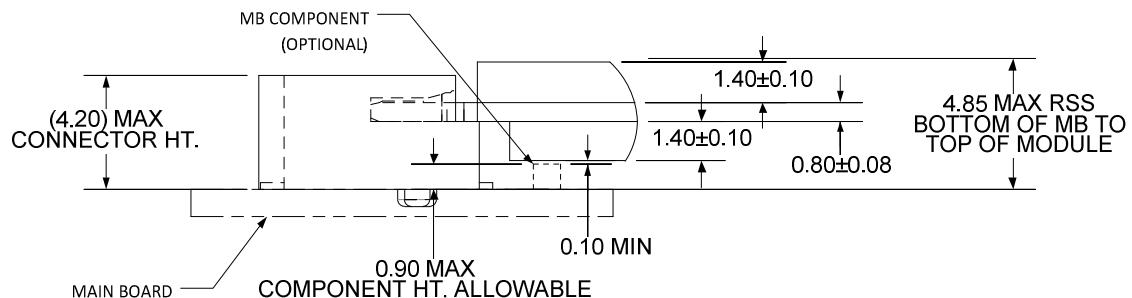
Elevated Double-sided Top Mount Solder Down Stand-off
